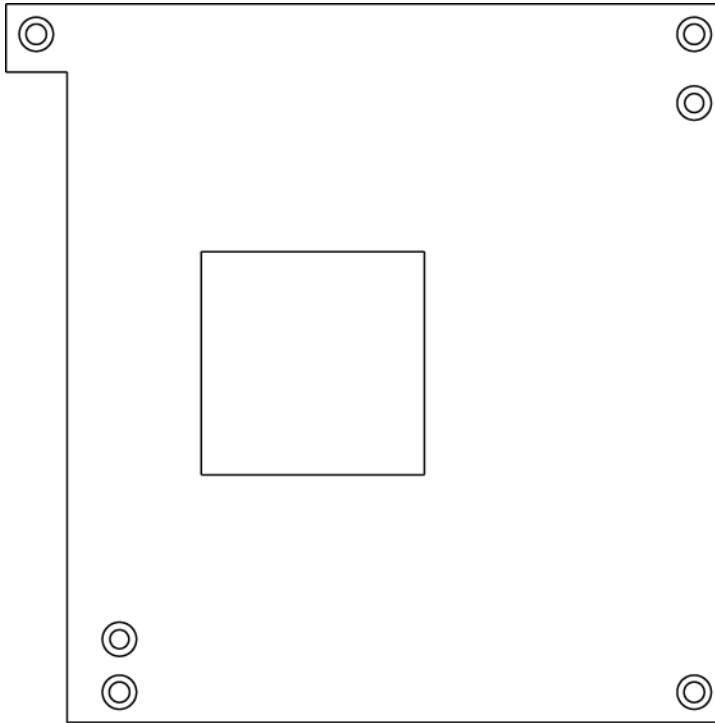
Heat Spreader Mechanical Illustration (Rear View)
